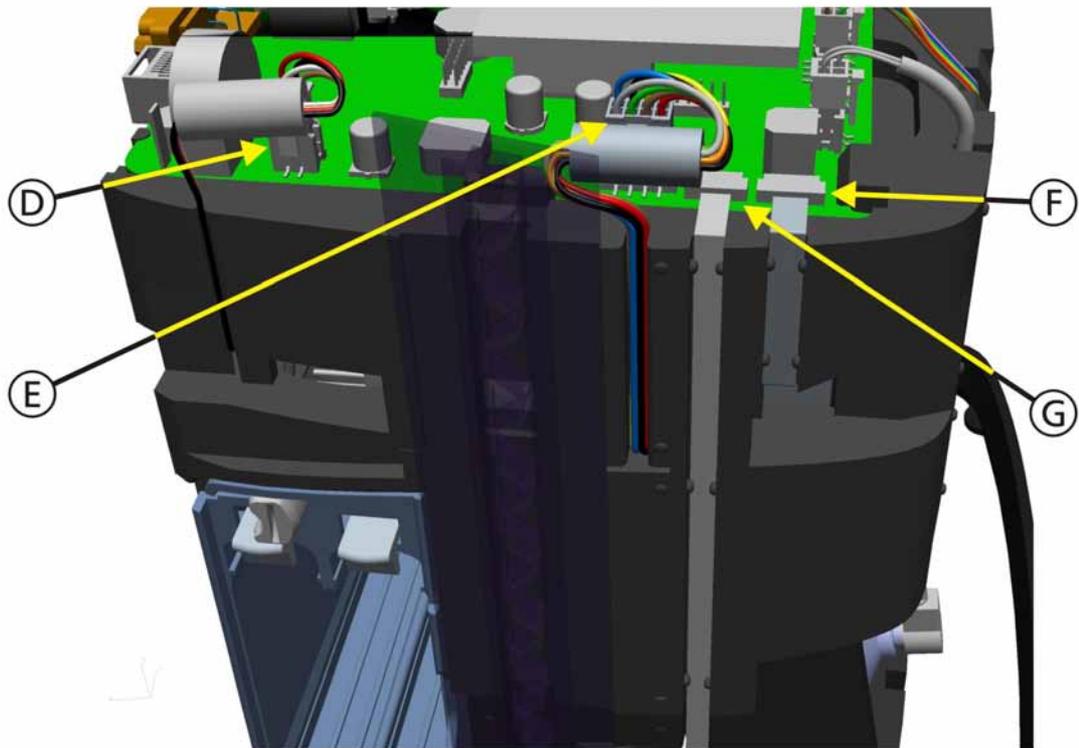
Top Foam Section and Mainboard Assembly, Step 3
